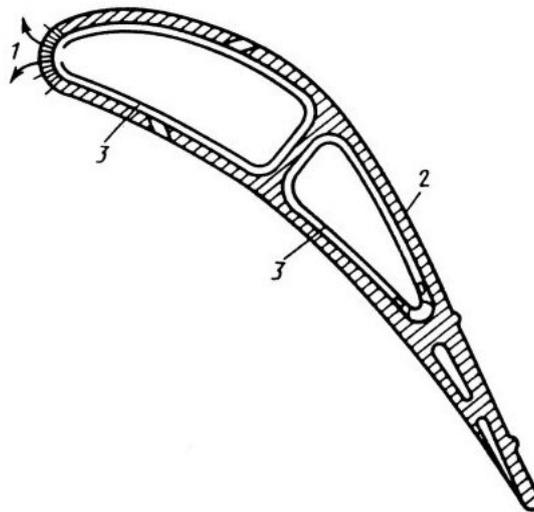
Scheme of convective-film cooling of the gas turbine blade: 1 – hole for coolant blowing-out; 2 – outer casing of the blade; 3 – deflectors
